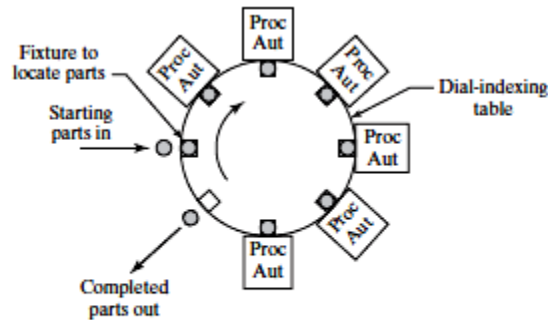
Rotary indexing machine (dial-indexing machine).
